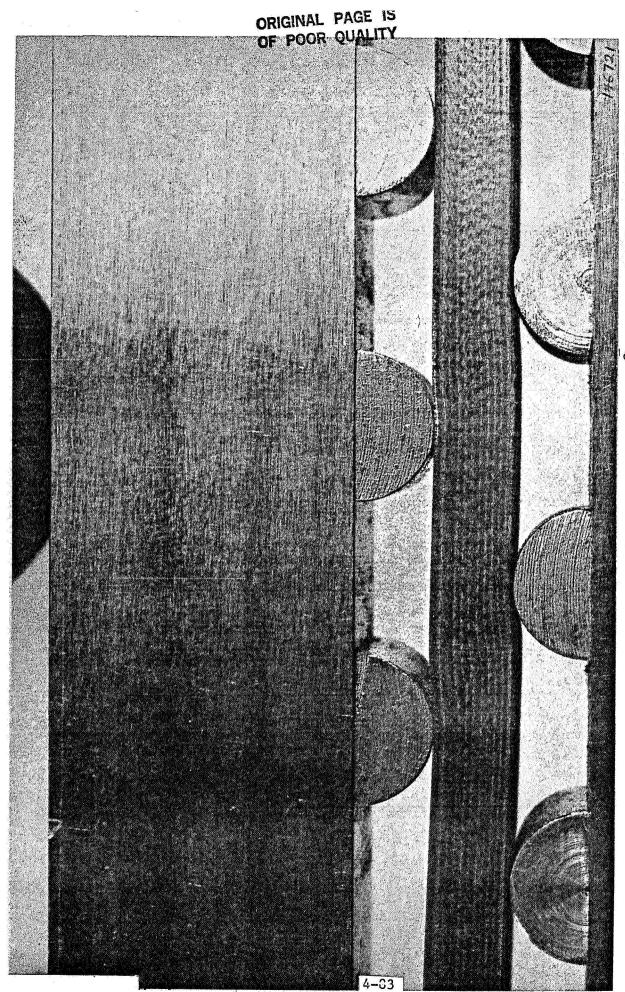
Failure Mode of 48-Ply AS4/2220-1 Specimen With 90° Orientation in the Longitudinal Axis.
